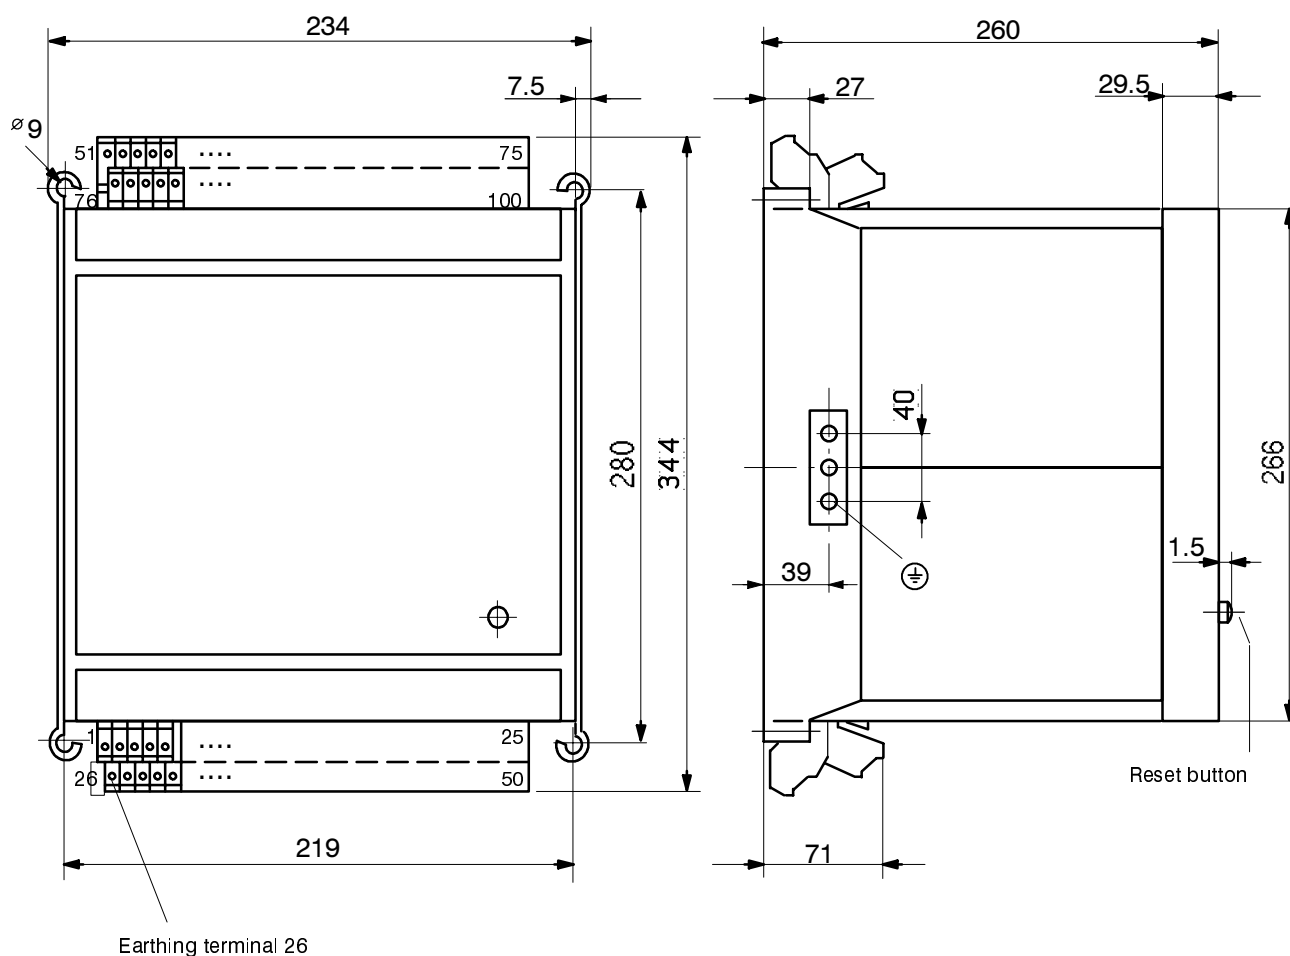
Connection plugs (rear view) – housing for flush mounting – example
